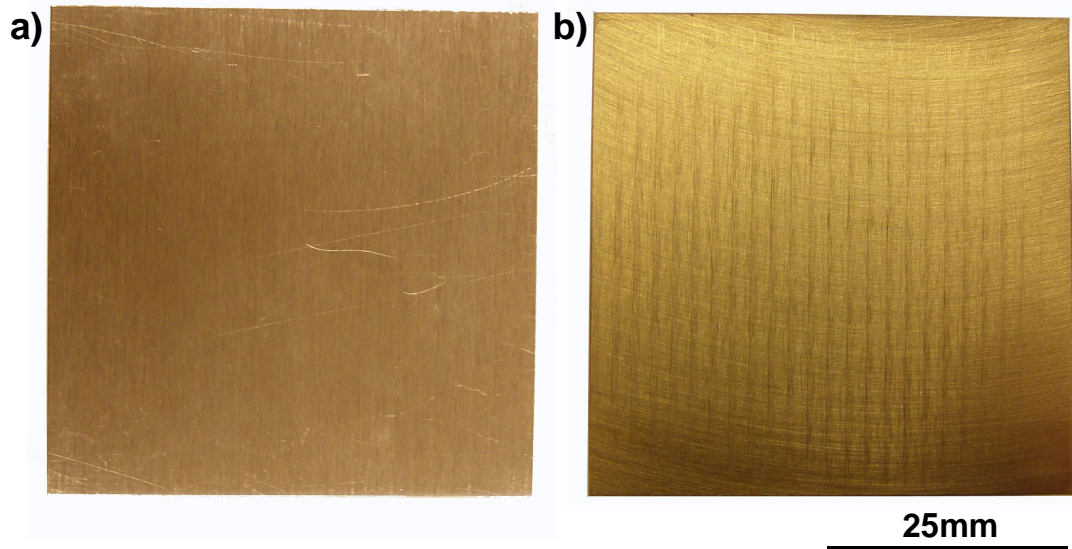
a) Photograph of blank sample after wire cutting and grinding to a nominal surface roughness of $1.6\mu\text{m Ra}$. b) Photograph of same blank sample after light polish with FEPA 180 grit paper, revealing 'corrugated' surface finish with wavelength of $\sim 2\text{mm}$.
